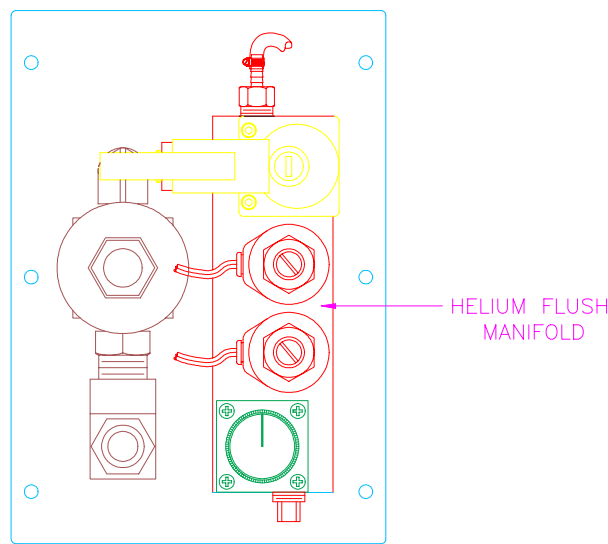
Helium flush manifold, vacuum/helium panel inside view
